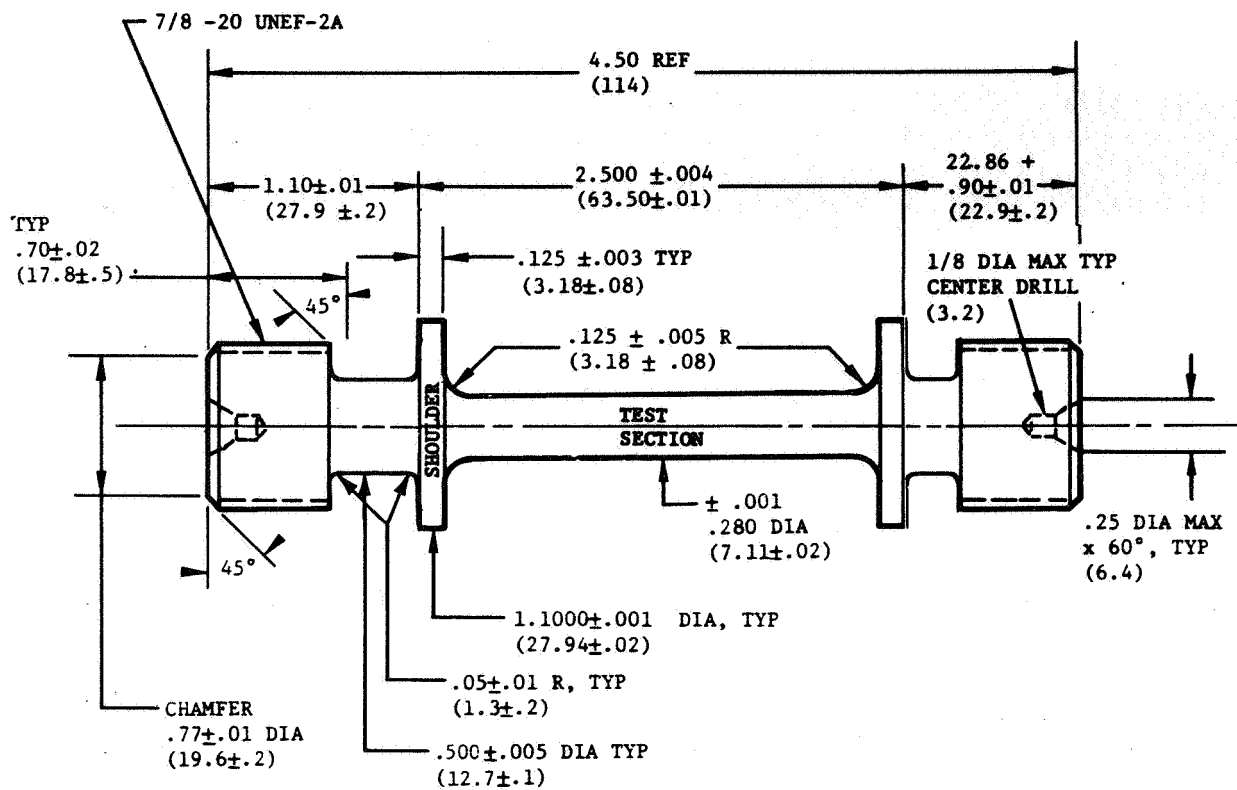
SPECIMEN - EXTENSOMETER ASSEMBLY
